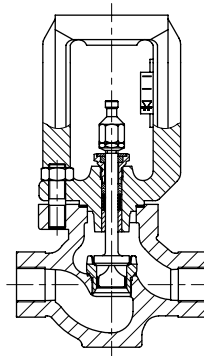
· Type 241 Globe Valve, sizes $\frac{1}{2}$ " to 2" with NPT thread
